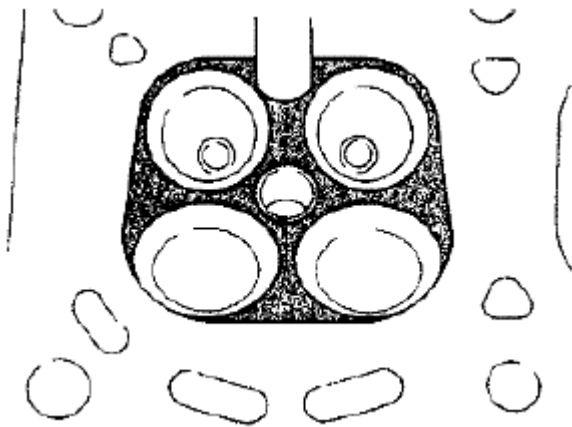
Removing Carbon Deposits From Combustion Chambers
